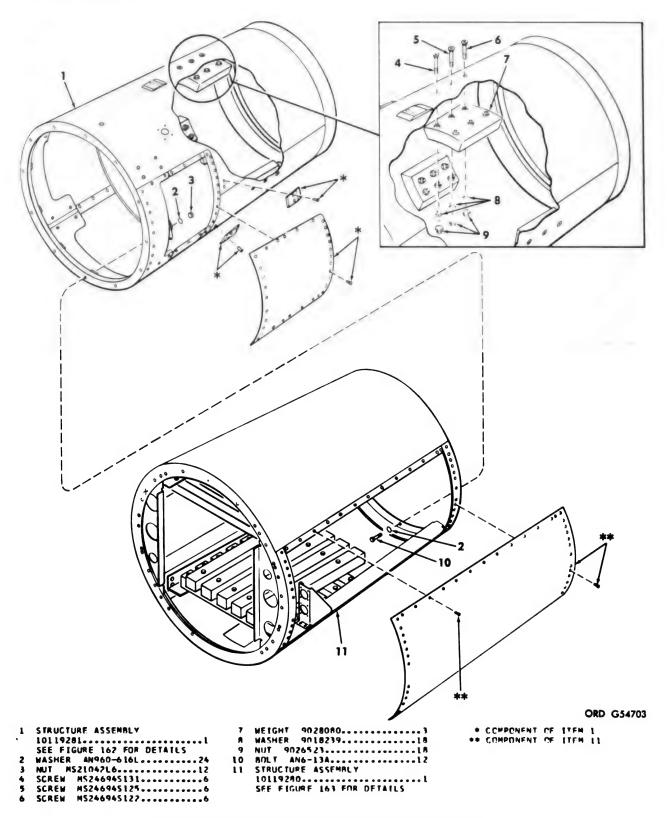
BODY SECTION, TRAINER, GUIDED MISSILE /10119279/ /SEE FIGURE 158 FOR MEXT HIGHER ASSEMBLY/
